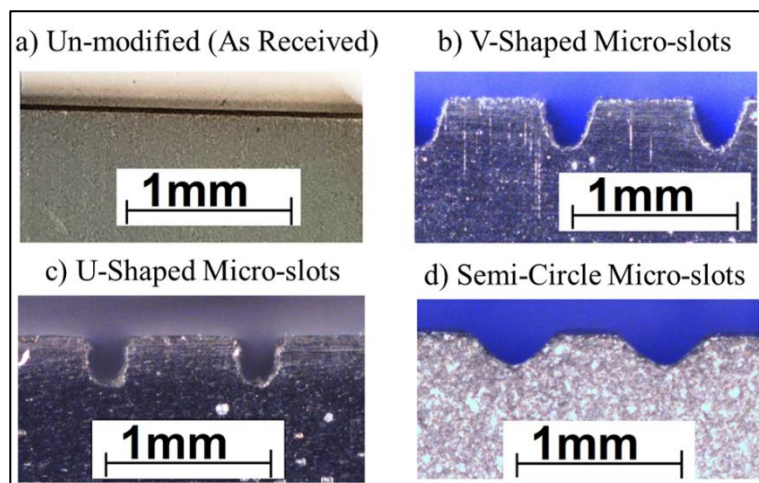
Macro images of a cross-sectional view of the un-modified micro-slots produced by in-house built Micro-EDM.
